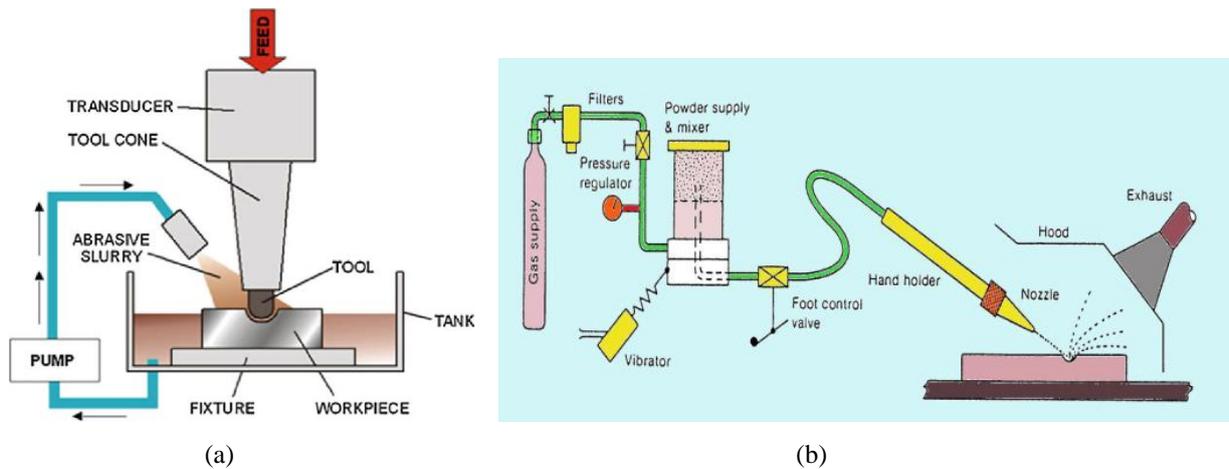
(a) Ultrasonic machining (b) Abrasive jet machining
